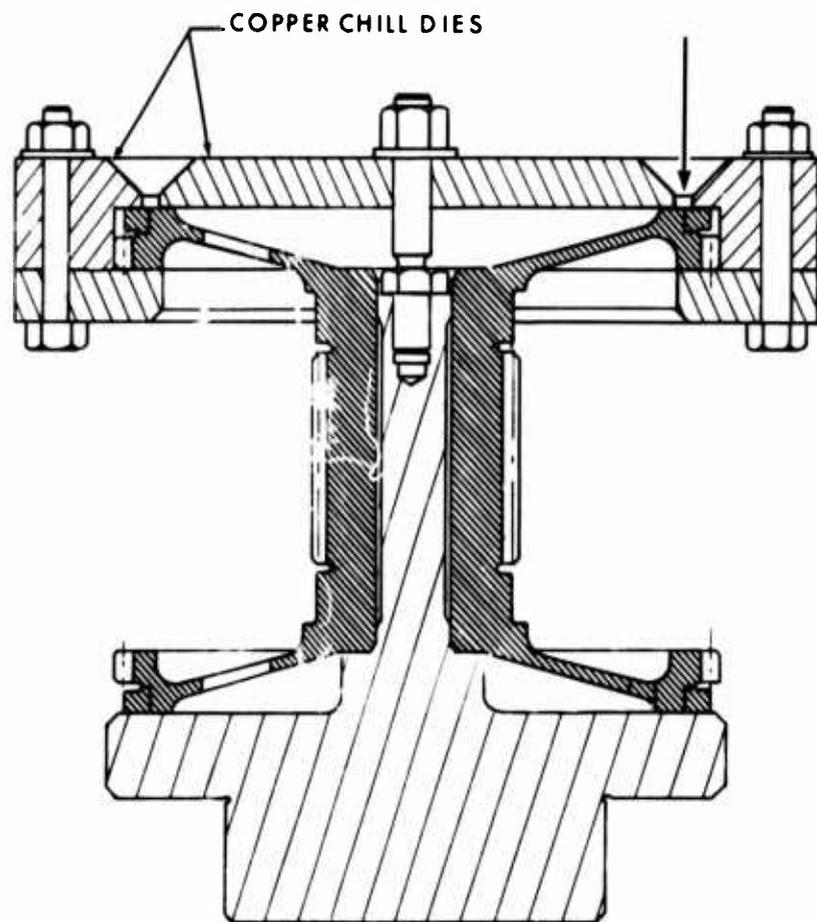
Welding Fixture for First-Row Pinion Roller Weld.
